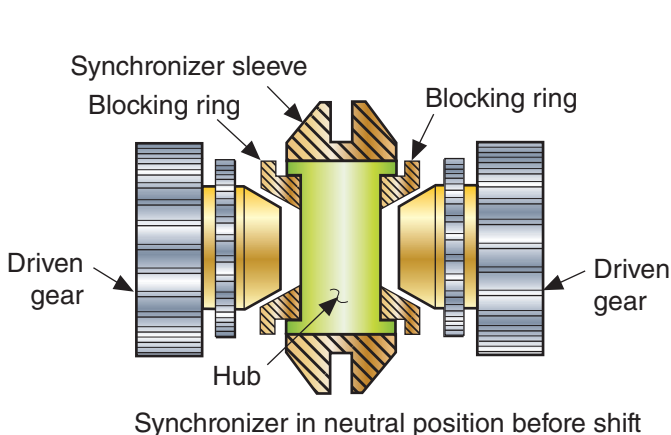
Gear shoulder and blocker ring mating surfaces.
